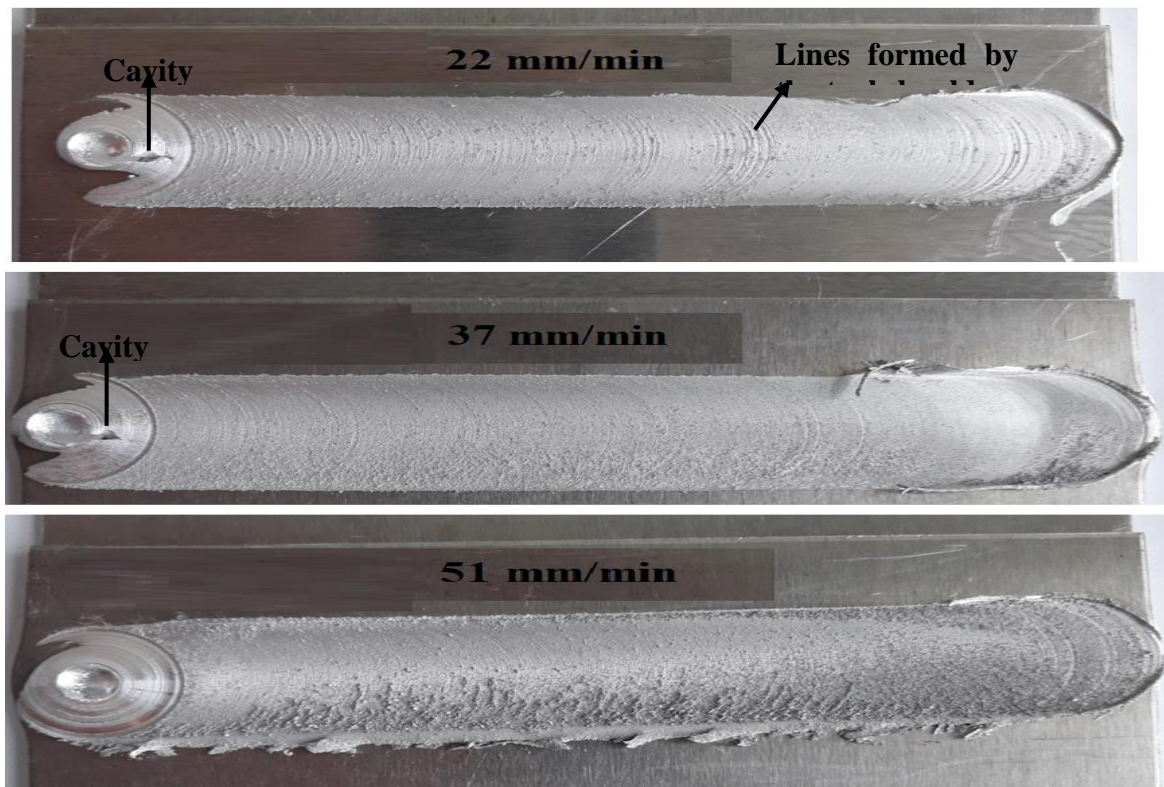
Top view of the FSLW joints produced at different tool feed rates
